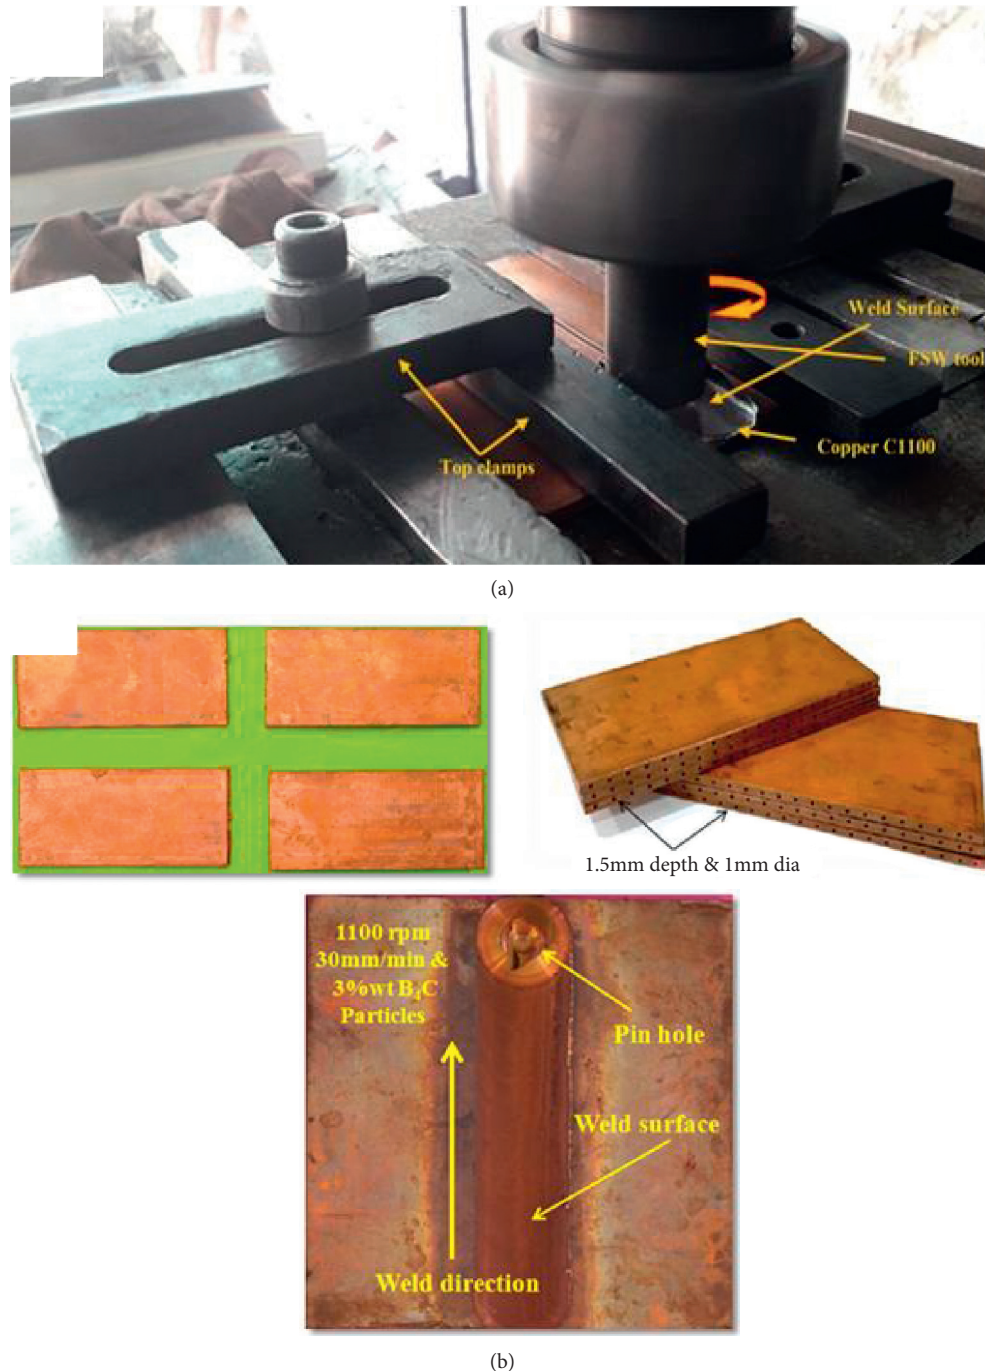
(a) Photographic view of the FSW process with inclusion of B_4C particles. (b) Before and after welded samples.
